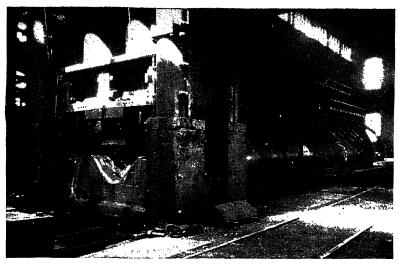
Closing in end-forging operation on 62-ft. boiler drum. The chain to rotate the work is visible in the background. Note the V-shaped lower die. (Bethlehem Steel Co.)
